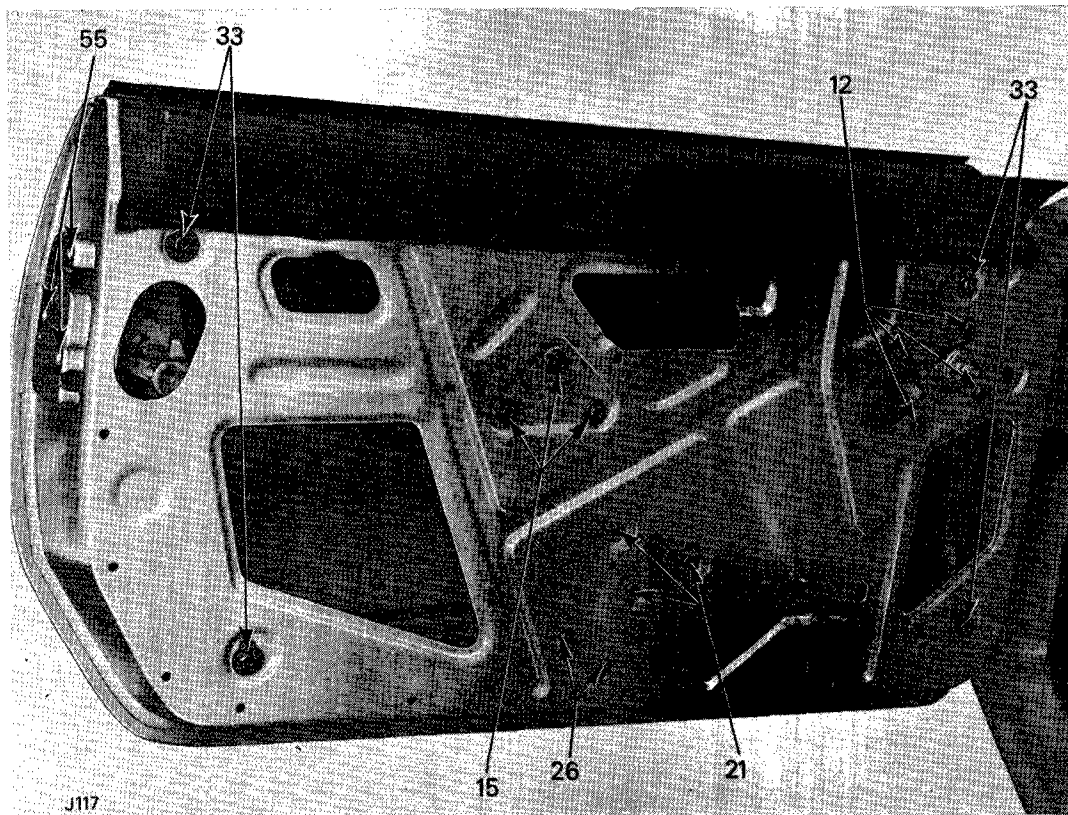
Door component fixings (Spitfire Mk. 2 and 3)
